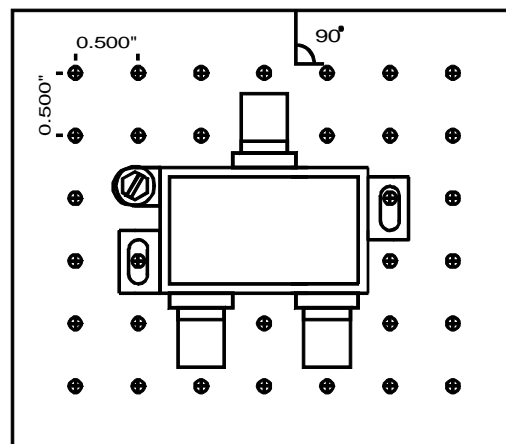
Orthogonal Mounting of Device on 0.500" Hole Pattern
